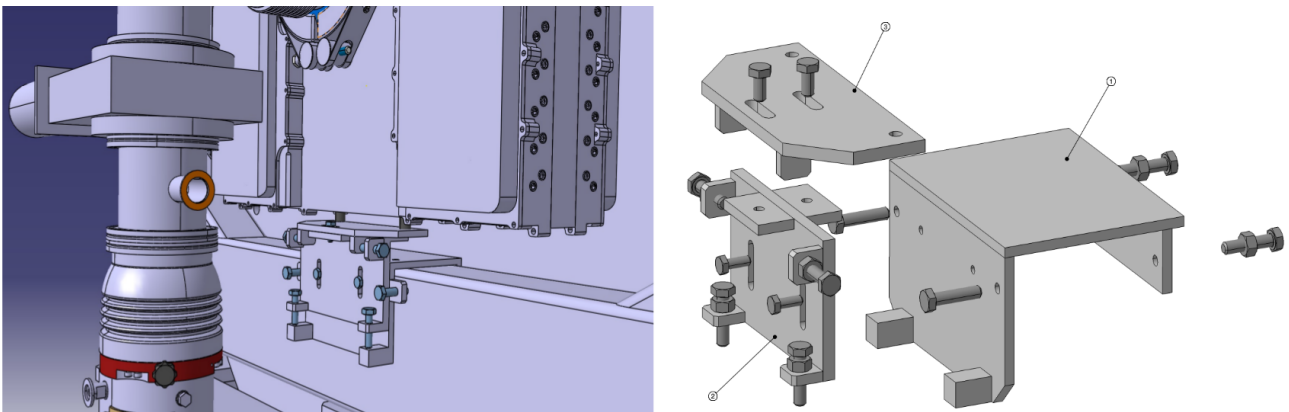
Assembly of the bottom support to TCX (left pane). CAD drawing of the bottom support (right pane): (1) U bracket sitting on the cross beam, (2) vertical plate with y movement, (3) top plate attached to bottom Veto Counter box; (2) and (3) form the T bracket. [13]
